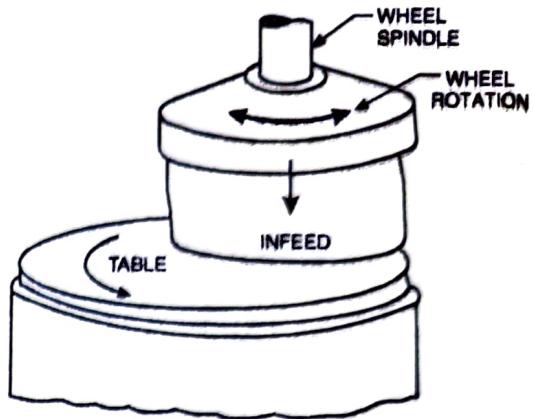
RELATIVE MOVEMENTS OF DIFFERENT PARTS OF A VERTICAL SPINDLE ROTARY TABLE SURFACE GRINDER.
